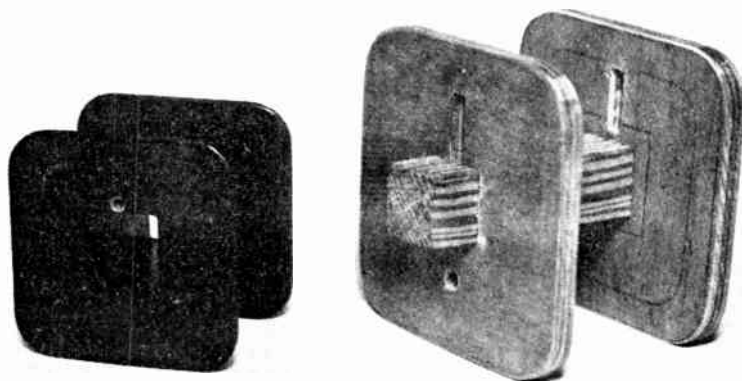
THE BLACK BAKELITE BOBBIN OF THE BELL TRANSFORMER. Showing the wooden winding jig used to support the bobbin during winding. Note the hole in the bobbin for the start of the primary winding. The size of the holes in the bobbin cheeks should be such that the systollex sleeving fits in them.
